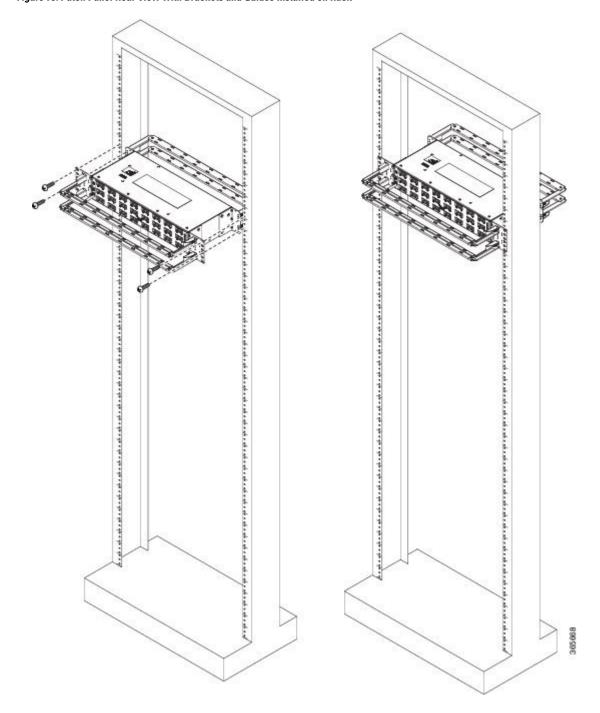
Patch Panel Rear View with Brackets and Guides Installed on Rack
